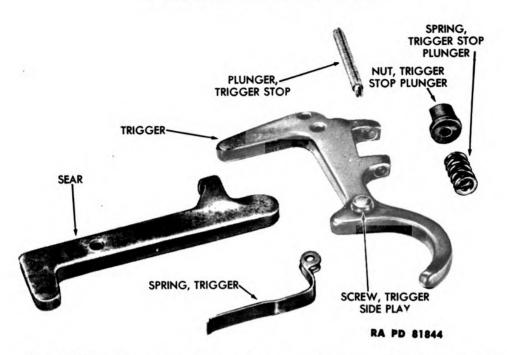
Sear and Trigger Group of Stevens Rifle, Cal. .22, Model 416-2 — Exploded View
